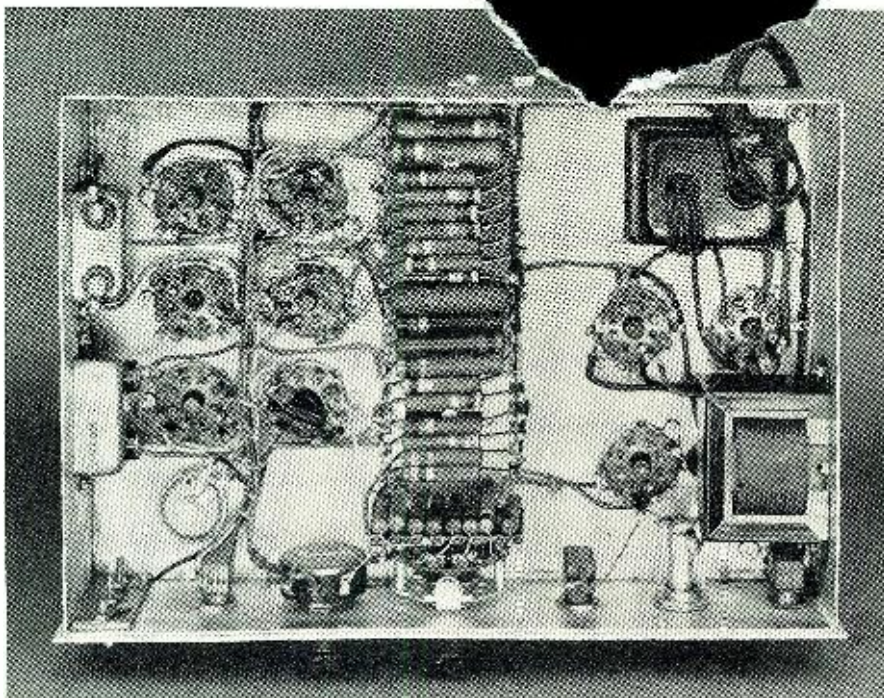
Rigidly mounted component parts: screws, nuts, and lock washers in lieu of rivets; cabled and color-coded wiring, makes this type of construction easy to analyze and service, and dependable in the extreme.
